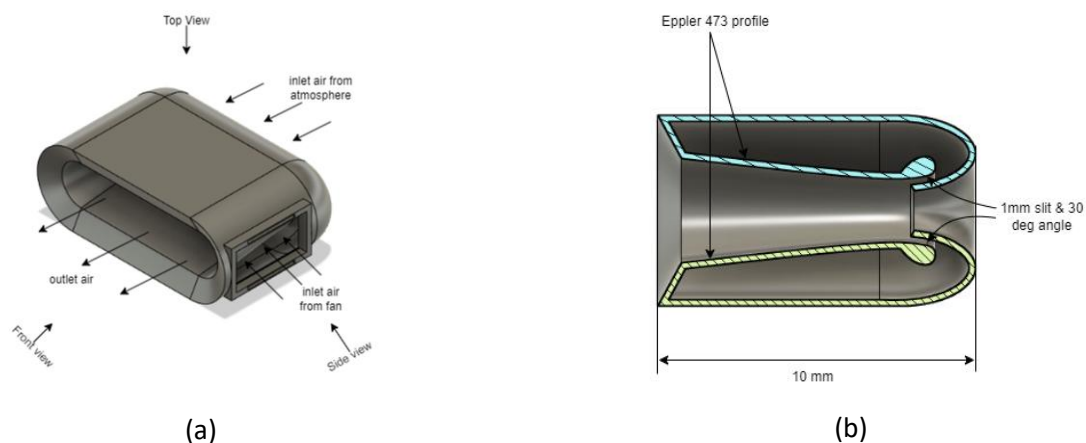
View (a) Isometric view of Design 1 (b) Cross-section view of Design 1
